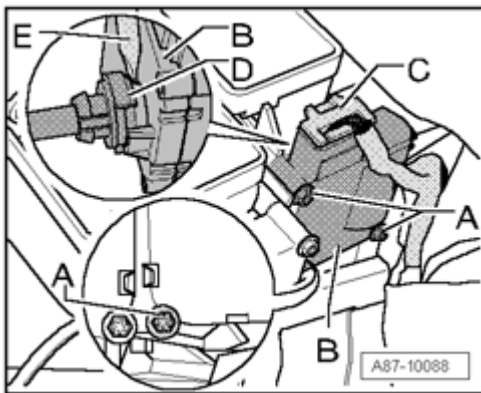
Identifying Connector, Bolts, Connecting Element, And Control Motor
